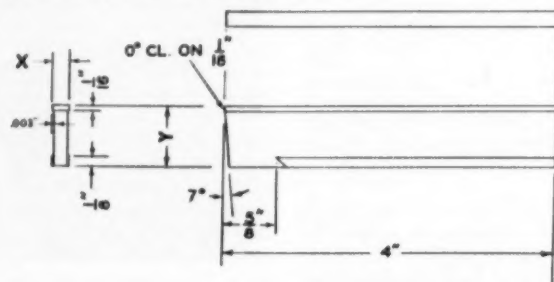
SPECIAL DESIGN CUTTING TOOL FOR PROFILING LATHE WORK, MOUNTING TRIANGULAR SECTION INSERT IN V-SEAT
